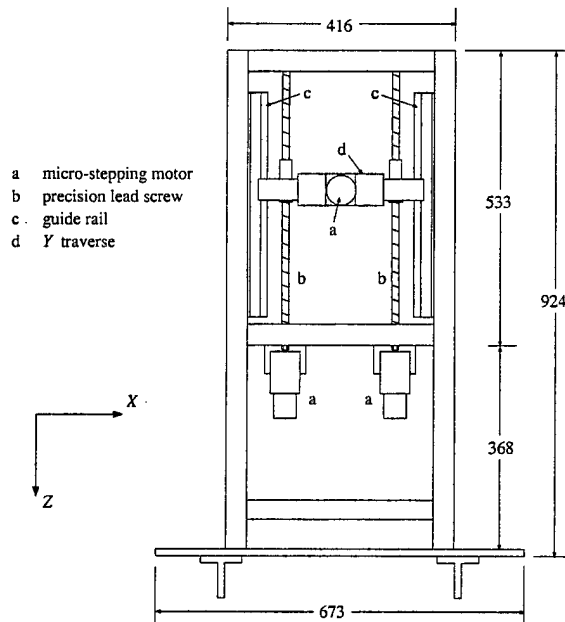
Front view of the traverse frame. All dimensions in millimeters.
